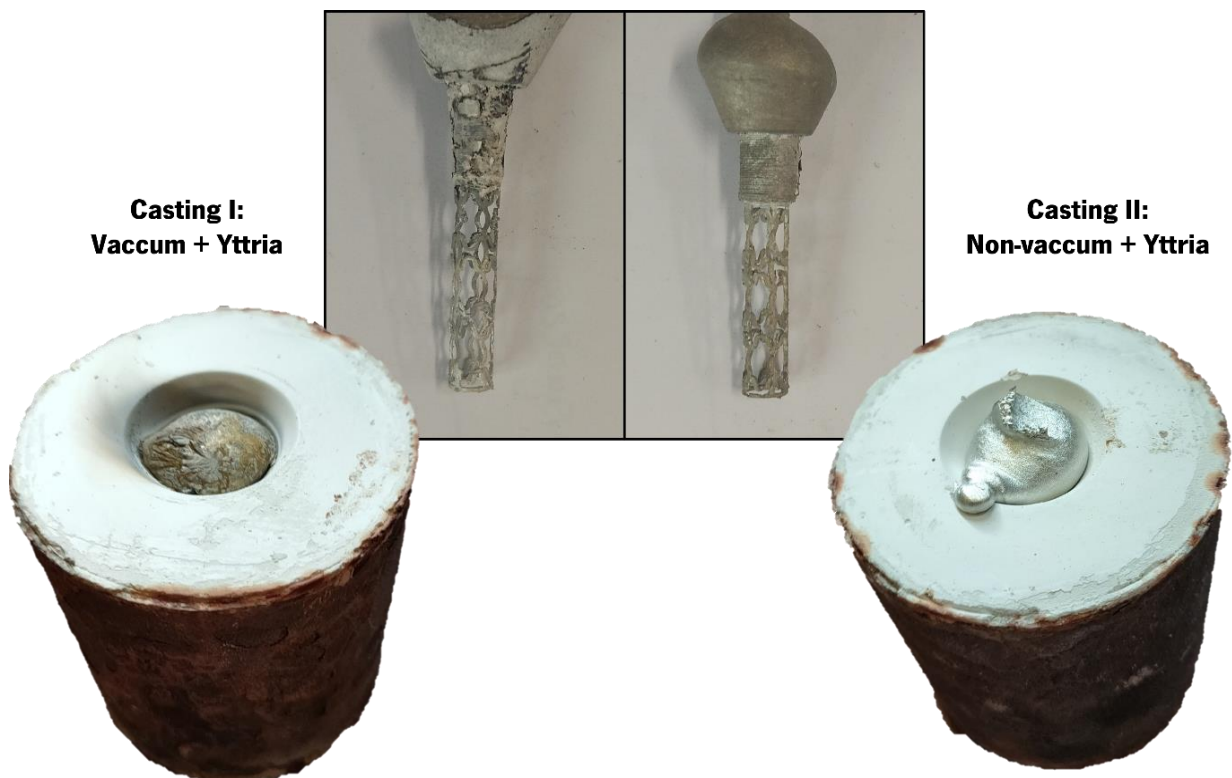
Mg stent investment casting in plaster molding of vacuum and non-vacuum castings.
